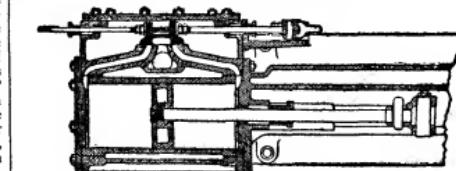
Horizontal Section through Cylinder and Valve-chest: showing Slide-valve.
